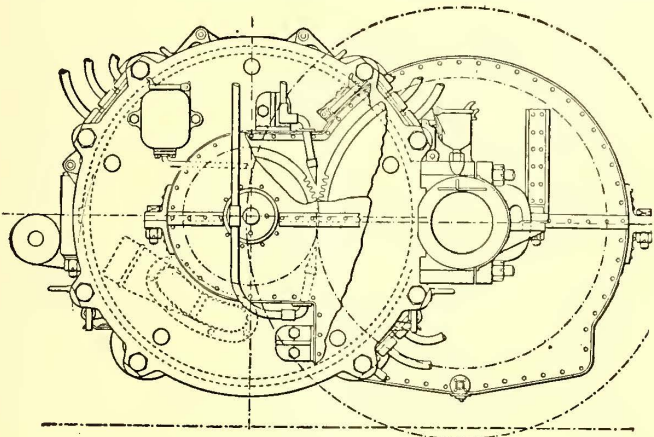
ELEVATION OF MOTOR AND GEAR CASE, SHOWING METHOD OF LUBRICATION
